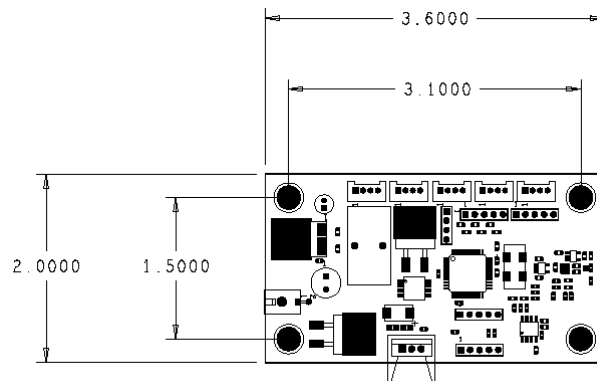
Controller Circuit Board Dimensional Drawing (courtesy of Bill Cross).
